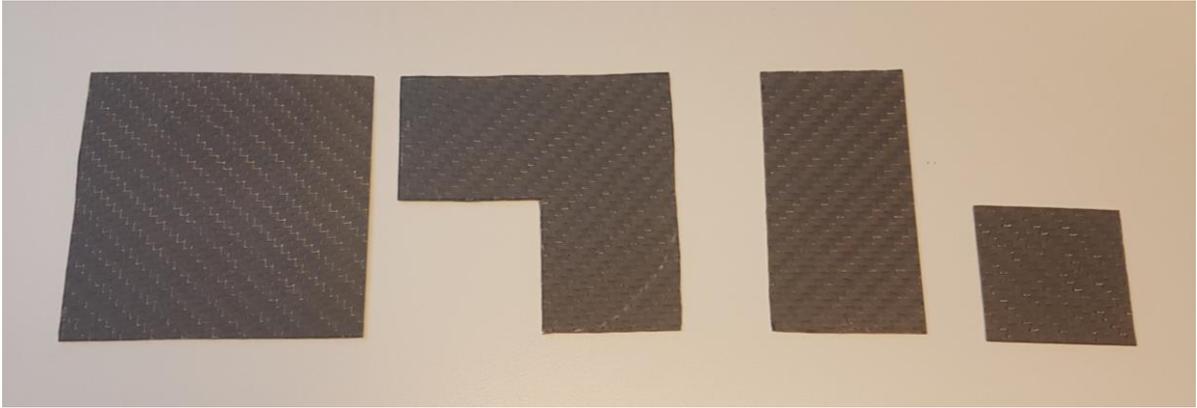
A built up of 1-4 layers of CFRP test pieces is obtained by sliding all the pieces to the left on top of the square piece.
